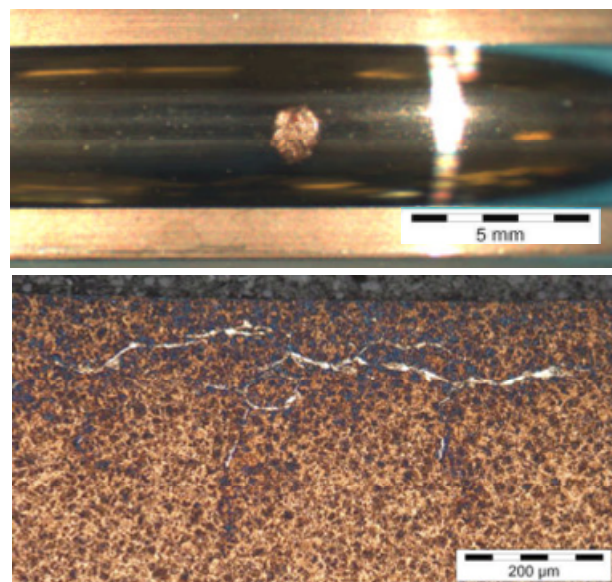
Pitting in an outer ring of belt tensioner and idler pulley bearing caused by WEC formation (after test, using belt B).
